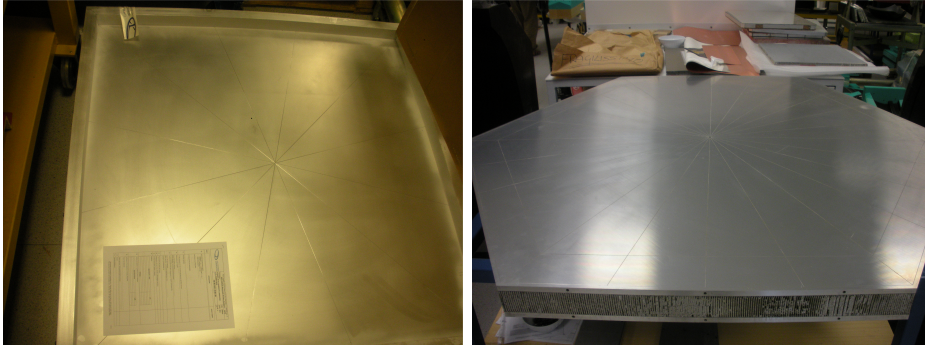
Images of two prototyping molds. *Left:* Mold with MAGIC II dimensions. *Right:* LST Mold.
